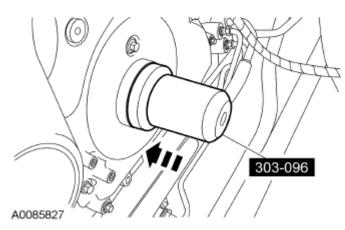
Installing Crankshaft Front Oil Seal Using Camshaft Front Oil Seal Installer (303-096)
